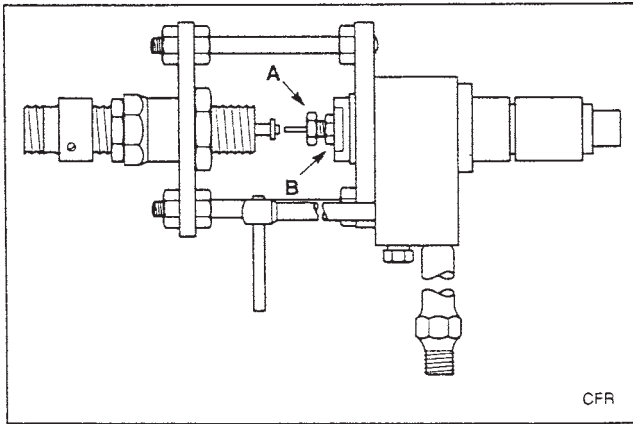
Injector Assembly Showing Pickup Mounted
